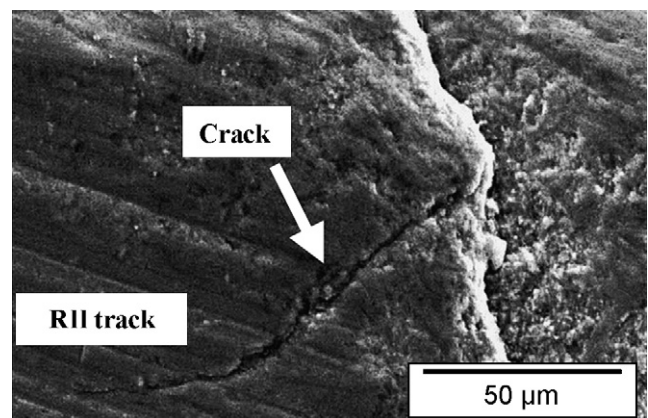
Crack in the roll groove of a silicon nitride roller after machining. The roller was not in service. Severe surface damage may occur by grinding the rollers.
